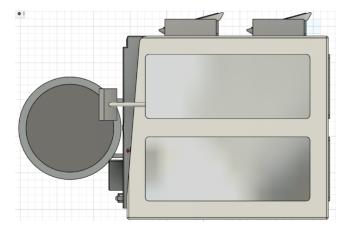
Sketch of the proposed washing machine design, viewed from the right. Designed using Autodesk Fusion 360.
